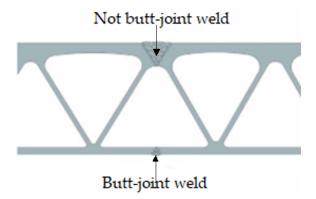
Presence of butt joint and other type of welding joints in the same extrusion [9].
